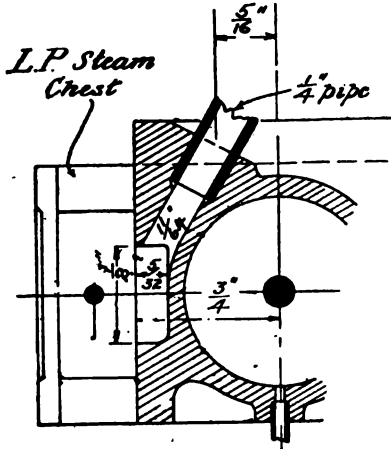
CROSS-SECTION OF L.-P. STEAM- CHEST IN CENTRE, SHOWING THE DRILLING OF THE EXHAUST PORT.
